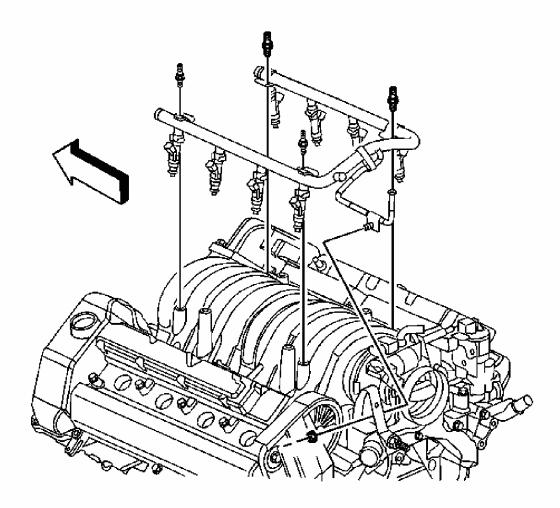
View Of Fuel Rail, Bracket & Bolts Courtesy of GENERAL MOTORS CORP.
